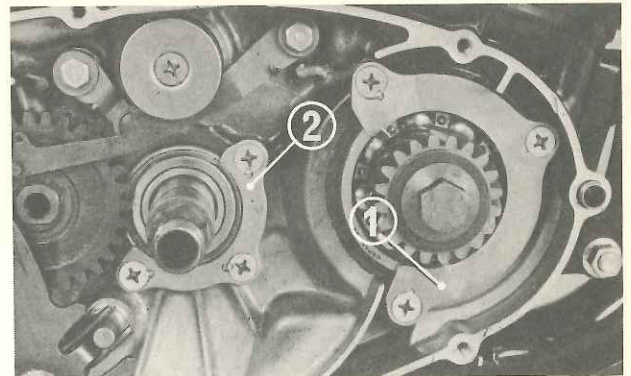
(1) Crankshaft bearing stopper plate (2) Main shaft bearing stopper plate
